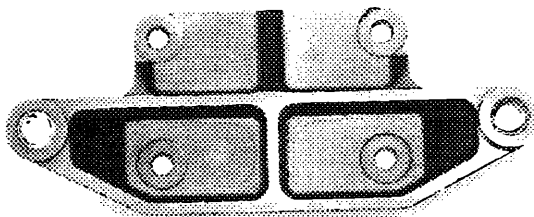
ALTERNATIVE REAR BRAKE CALIPER POSITION
